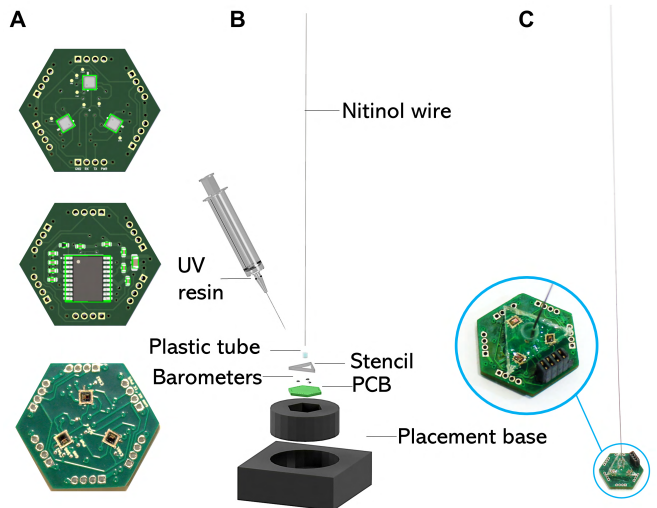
Whisker design and fabrication. A) Front and Back View of 4-Layer PCB and barometer without package. B) Components of whisker fabrication. The stencil is removed after molding the follicle structure. The placement base serves solely for subsequent characterization and localization experiments. C) Example picture of a whisker sensor.
